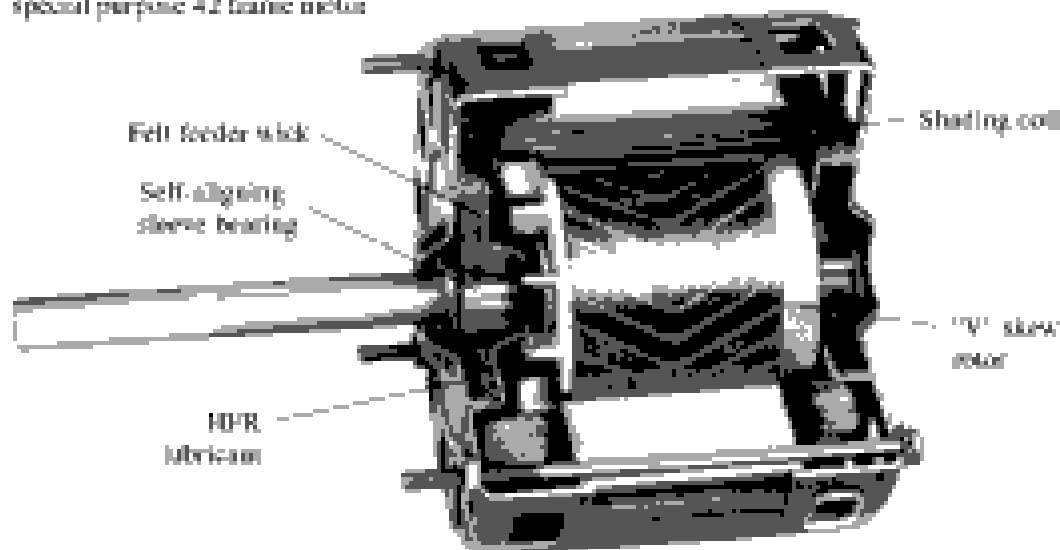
Cutaway view of a shaded-pole induction motor. (Courtesy of Westinghouse Electric Corporation.)
